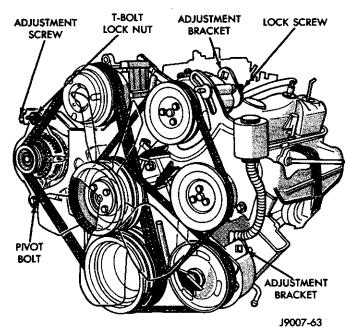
Accessory Drive System—Heavy Duty Cycle 5.9L Engine
